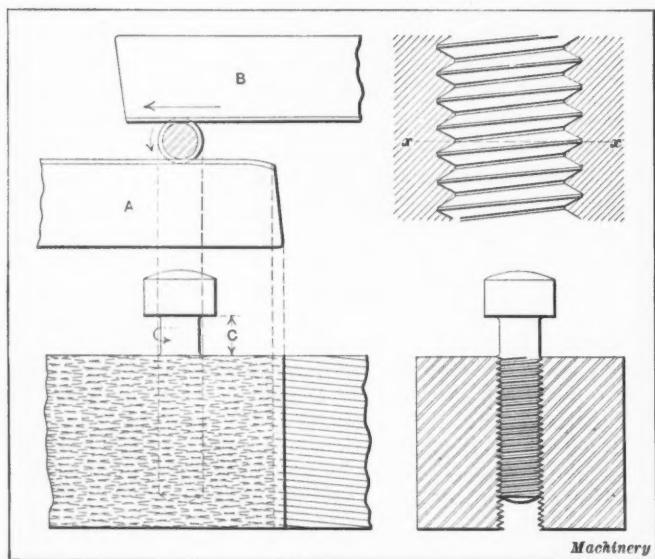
Diagram illustrating how Screw Thread is rolled between Flat Dies
